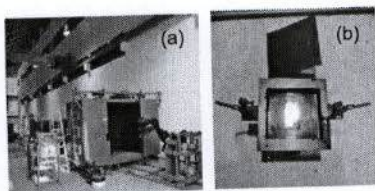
shows a Shuttle Style Rotational Molding M/C and (b) a two-part steel mould
